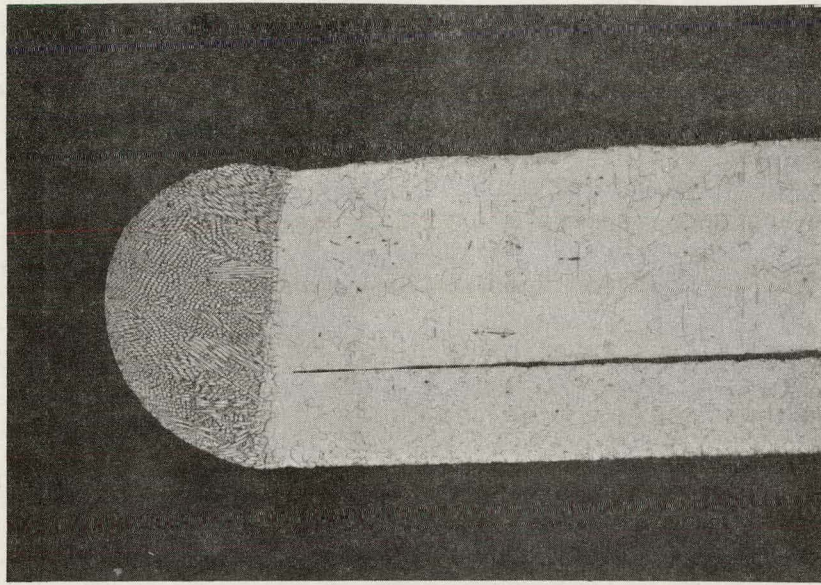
Typical weld zone on recessed cup-cap using external chill to reduce ferrite formation.
